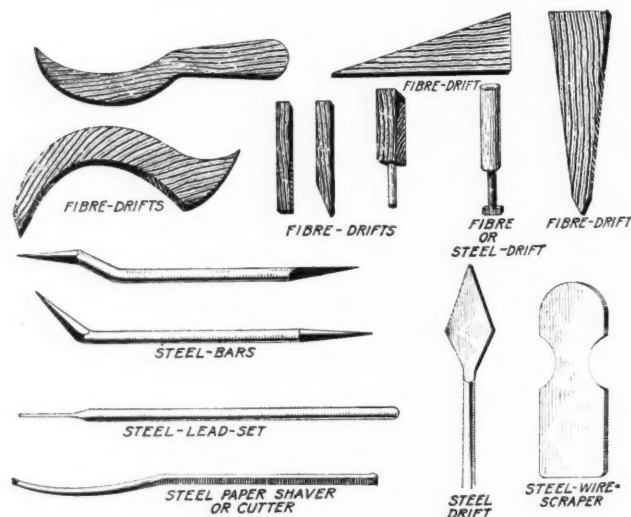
A FEW ARMATURE REWINDING TOOLS
